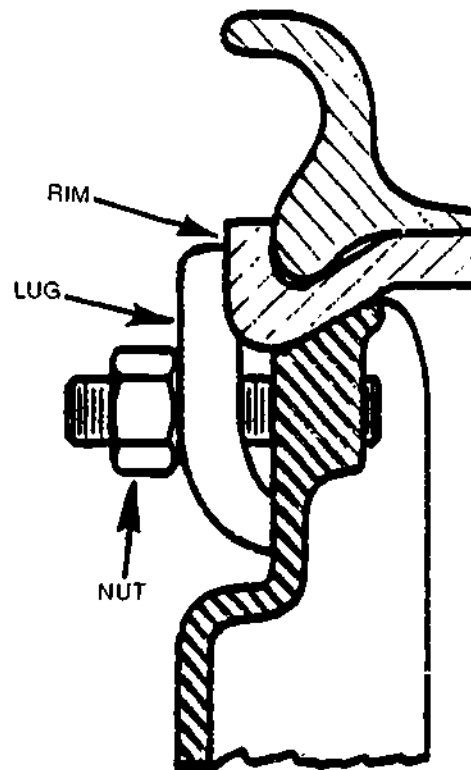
shows a typical cast spoke wheel and demountable rim. Note that the wheel and hub are integral parts. The rim slides over the wheel and is retained by clamps (lugs) and nuts. The lugs fit over hub studs and grip the outside edge of the outer lip of the rim as shown in the figure.
